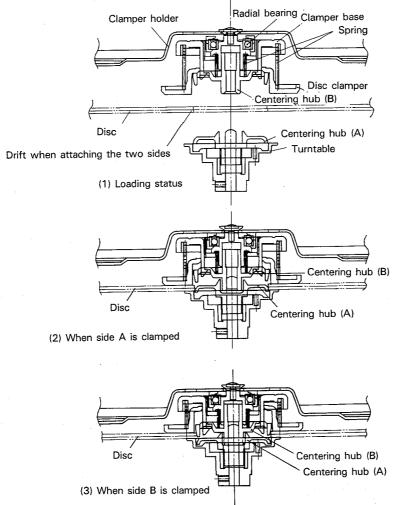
Disc clamping mechanism with side A/B independent centering system
